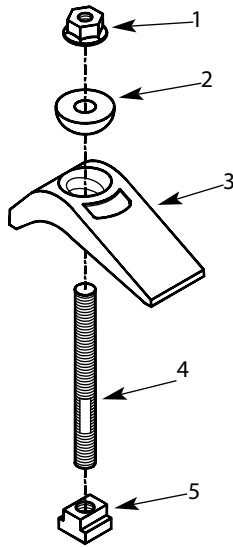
Replacement Parts Illustration for U-Clamp Set
